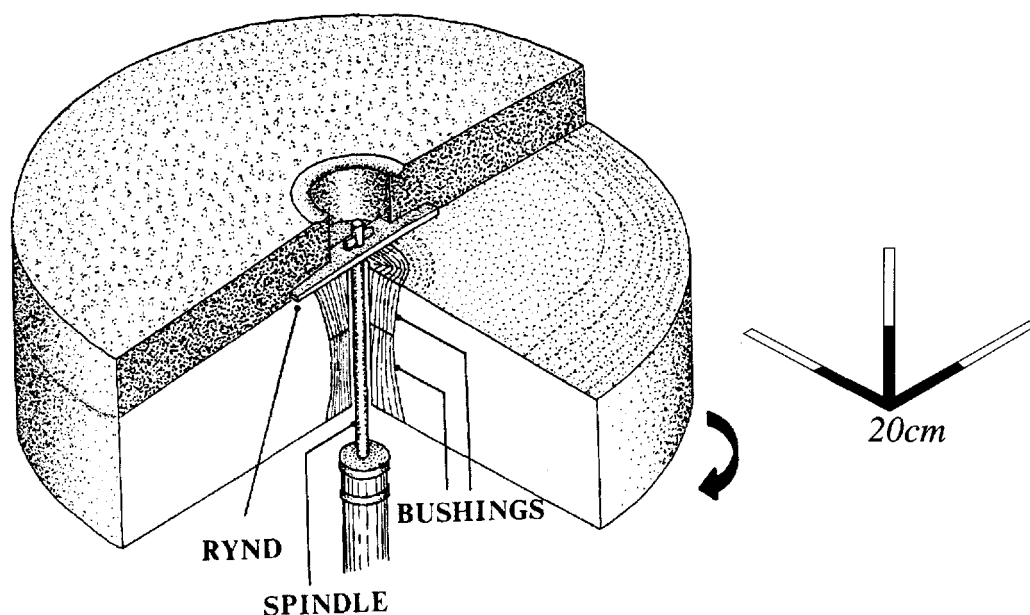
Millstone assembly in early medieval Irish horizontal-wheeled mill.
